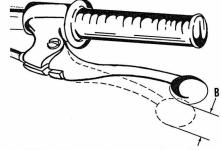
Clutch cable should be adjusted to provide free play at B. Refer to text.
